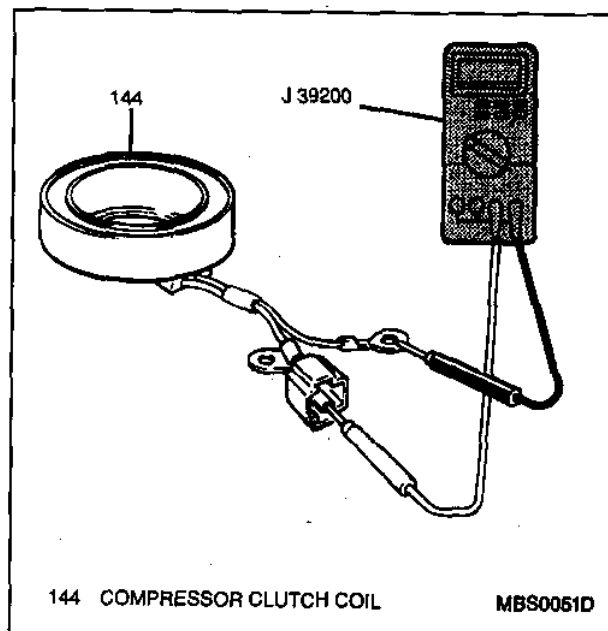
Inspecting A/C Compressor Clutch Coil Resistance
